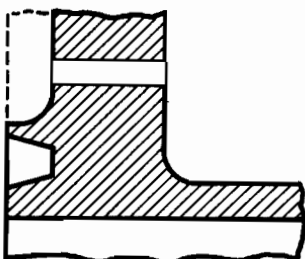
Cross-Section of a Socket-Welded Tee Connection.
